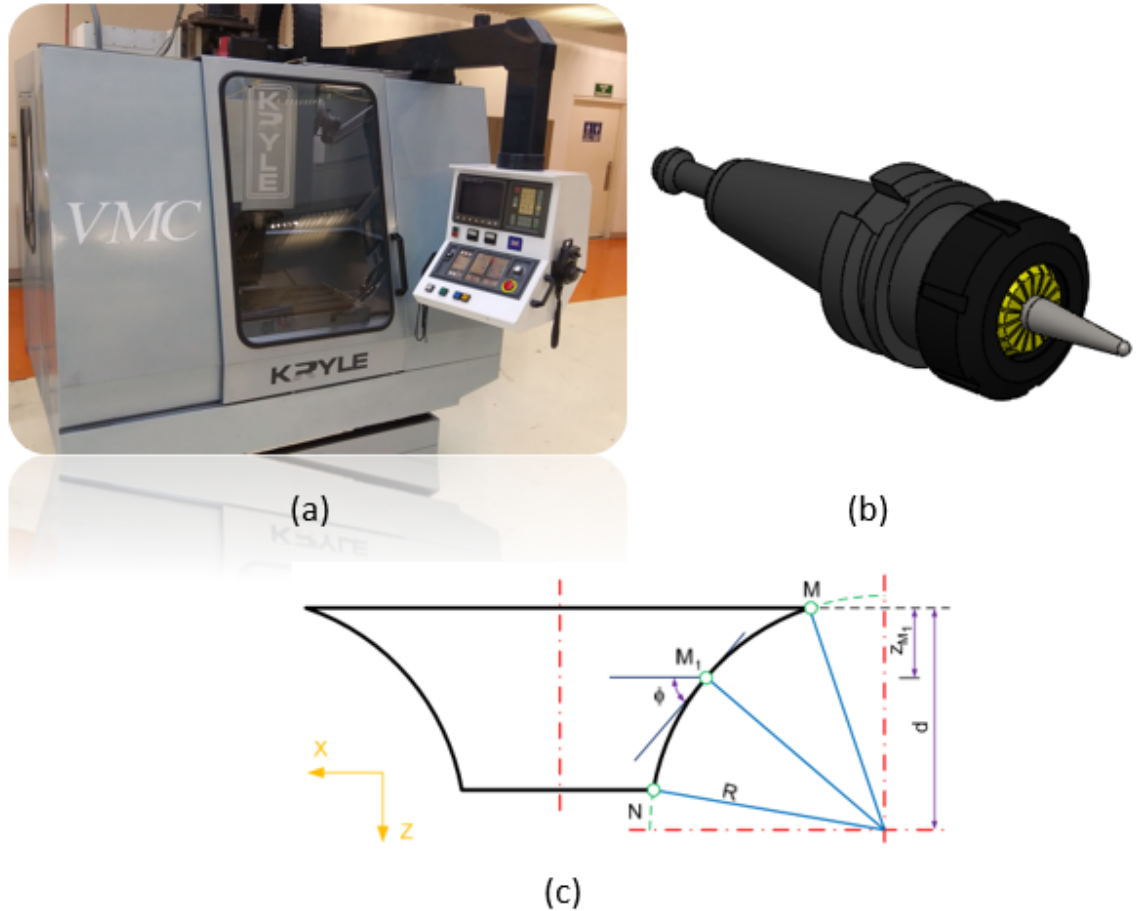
Single point incremental forming: (a) Kryle VMC 535 vertical CNC milling machine; (b) Hemispherical D2 steel tool; (c) Axi-symmetric SPIF geometry [63].
